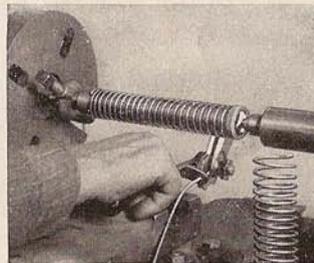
Winding a Steel Spring. Attachment makes springs from wire 0" to 1/8" diam. Cat. No. 488.....\$2.50
